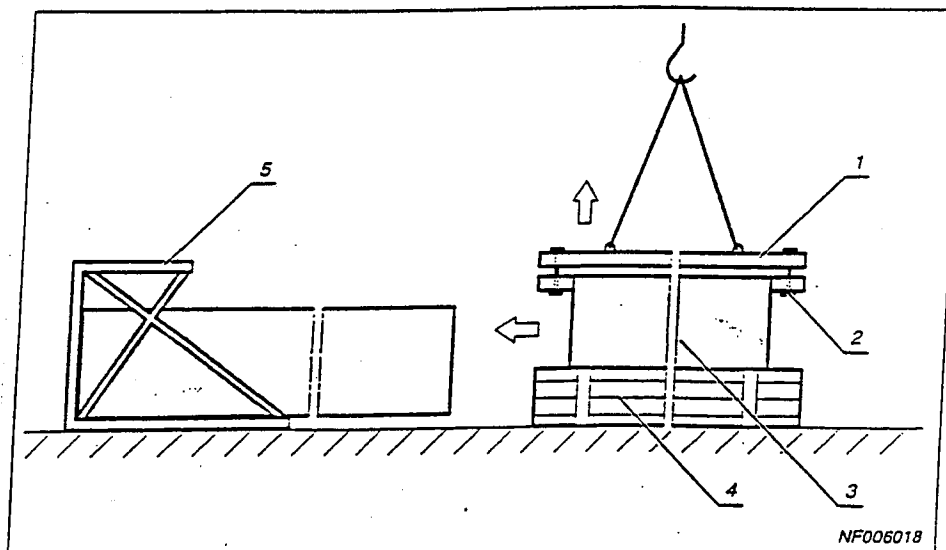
Unpacking the press sleeve and allowing it to hang out
